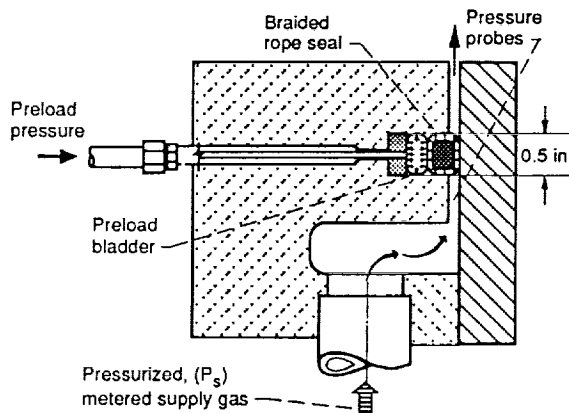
Cross-section of room temperature braided rope seal leakage test fixture.
